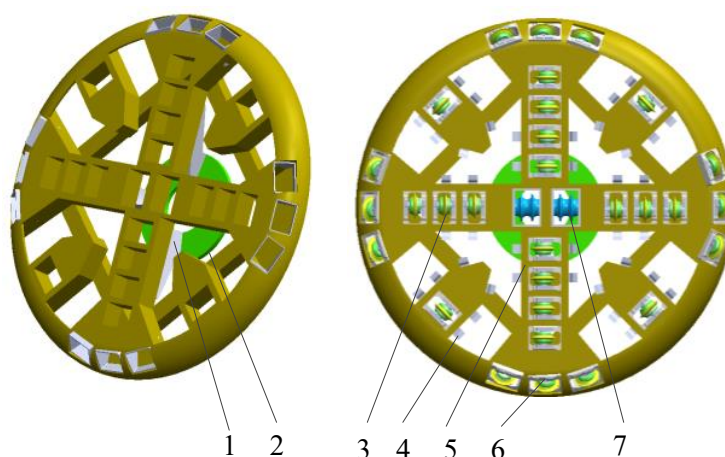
Model of shield cutterhead. 1-support; 2-flange; 3-normal disc cutter; 4-Scraper; 5-cutter beam; 6-gage disc cutter; 7-central disc cutter.
